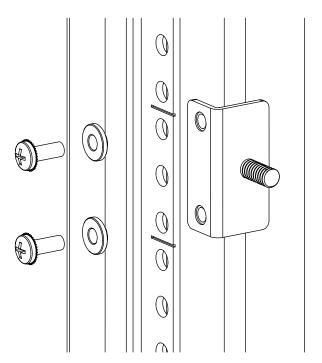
Installing the rear mounting brackets (HP System/e rack—left rear upright)
